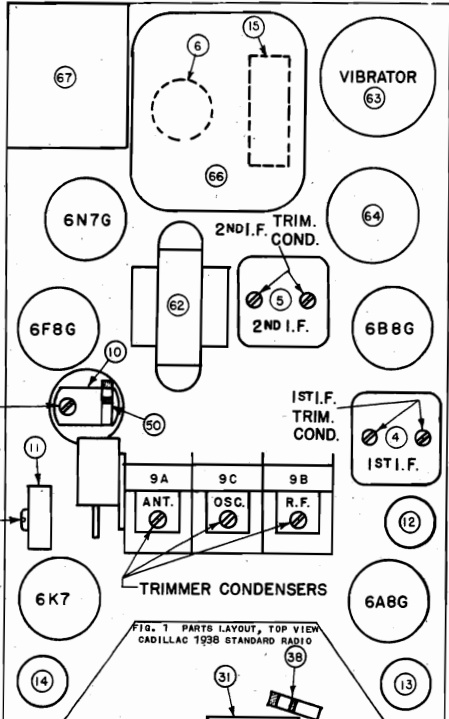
PARTS LAYOUT, TOP VIEW CADILLAC 1938 STANDARD RADIO
